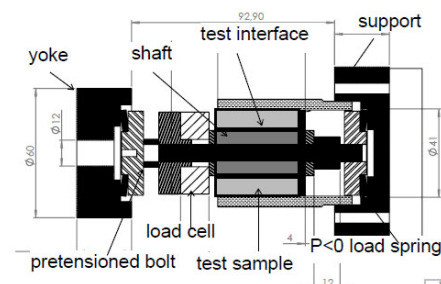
Cylinder test adapter for converting simple compression machine to $R = -1$ biaxial shear test machine.
